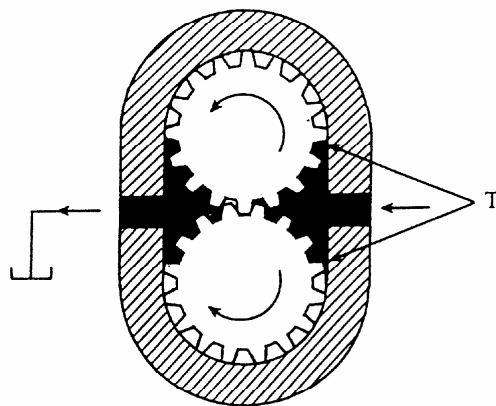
Generated form hydraulic motor – external gear type. Torque (T) is a function of pressure acting on one tooth on one gear (alternating between gears).
